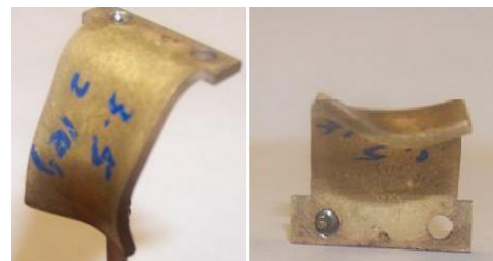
EM Non uniform flanging of 1.588mm specimen.
